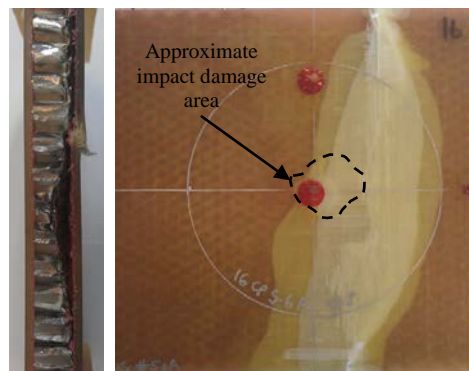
Photographs showing a side and front view of an impacted E-glass/epoxy sandwich panel
